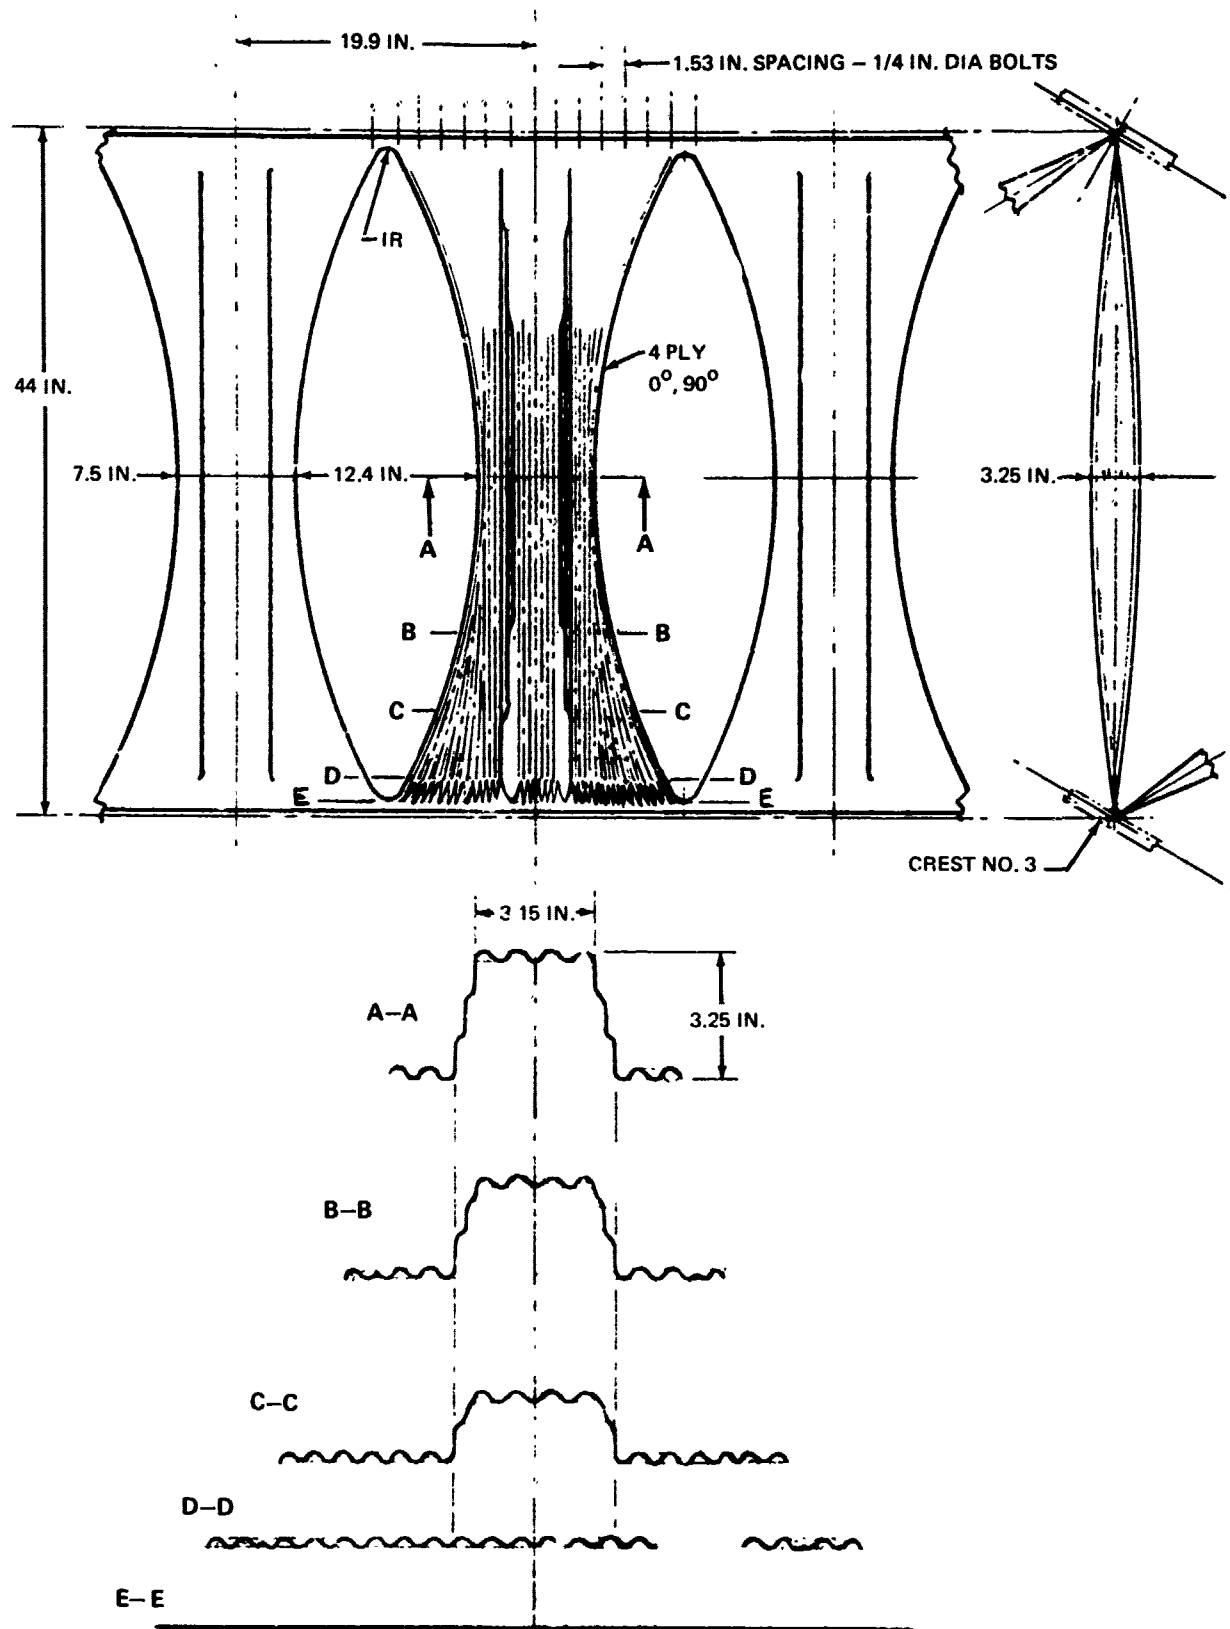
CORRUGATED HAT SECTION STRUT - STA 0 TO 82
